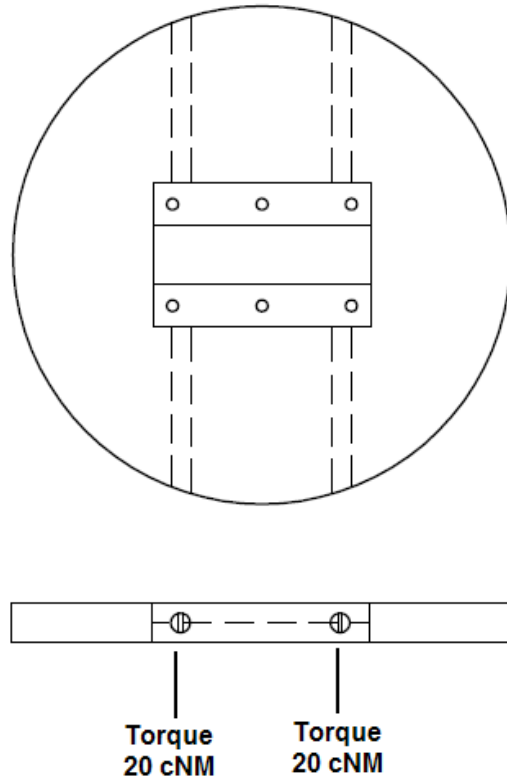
Drawing of the clamp in the upper part of the flame gap, with the two screws that must be fastened with a torque of 20 cNm
